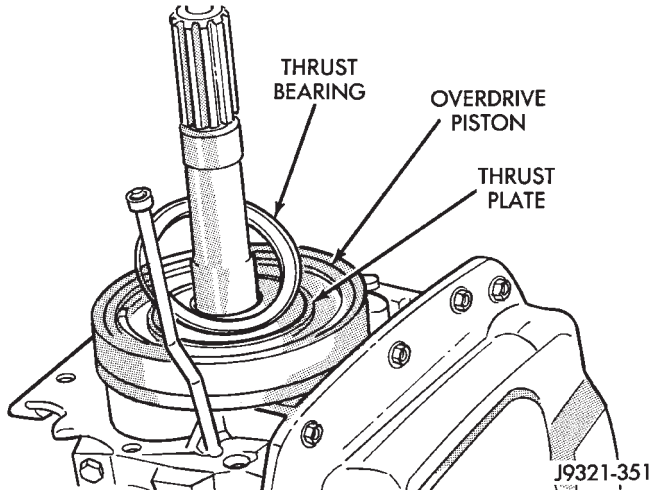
Overdrive Piston Thrust Bearing Removal/Installation
